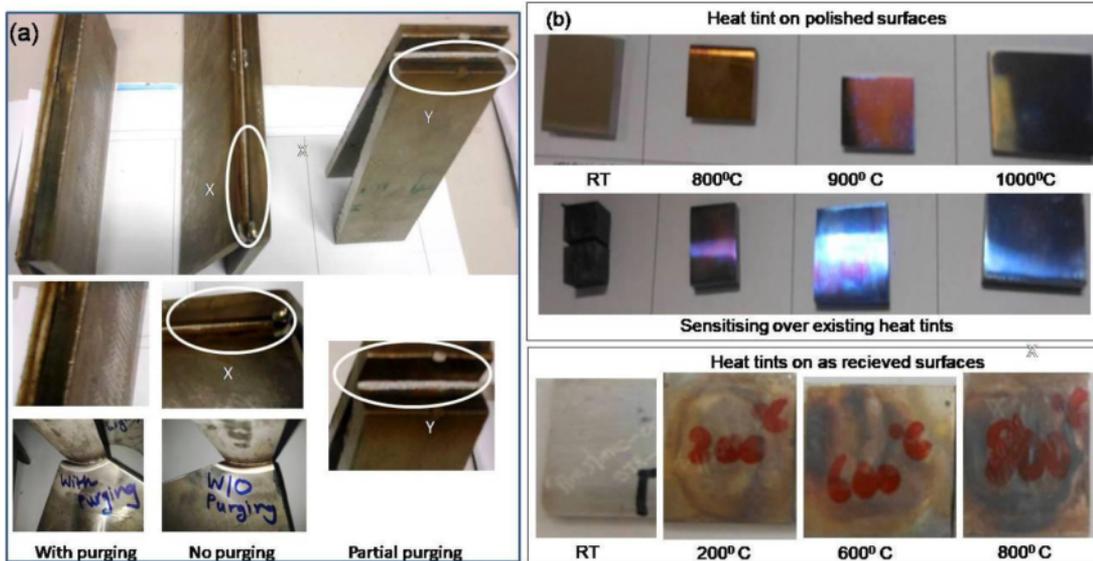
Heat-tinted areas (a) on the adjoining surfaces of the root side in fillet weld joints, where no purging or partial purging was employed during welding, and (b) produced on the base metal with both polished and as-received surfaces.
